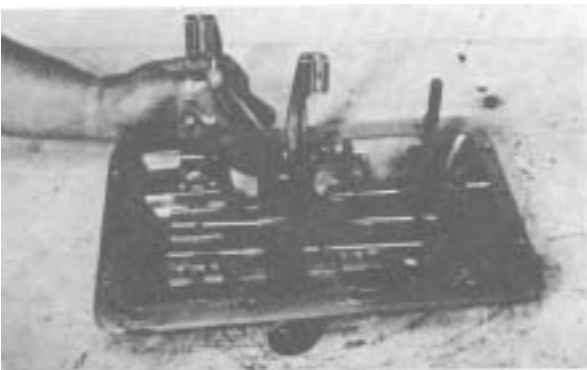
Remove the 4th and 5th shift fork and rail assembly.
